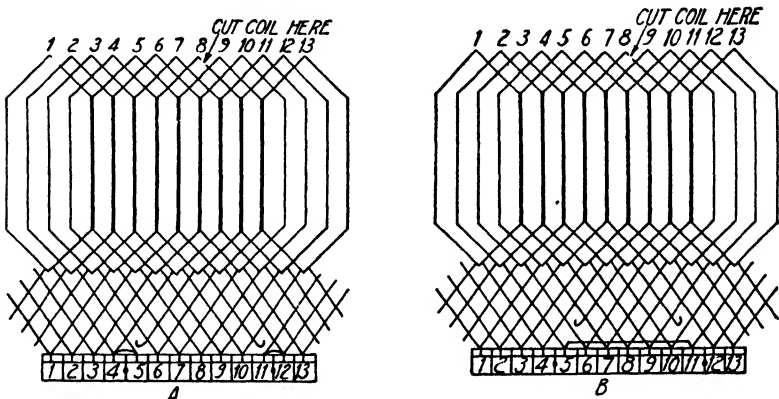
Wrong Method (A) and Right Method (B) of Cutting Out a Defective Coil in a Single-Series (Wave) Winding
